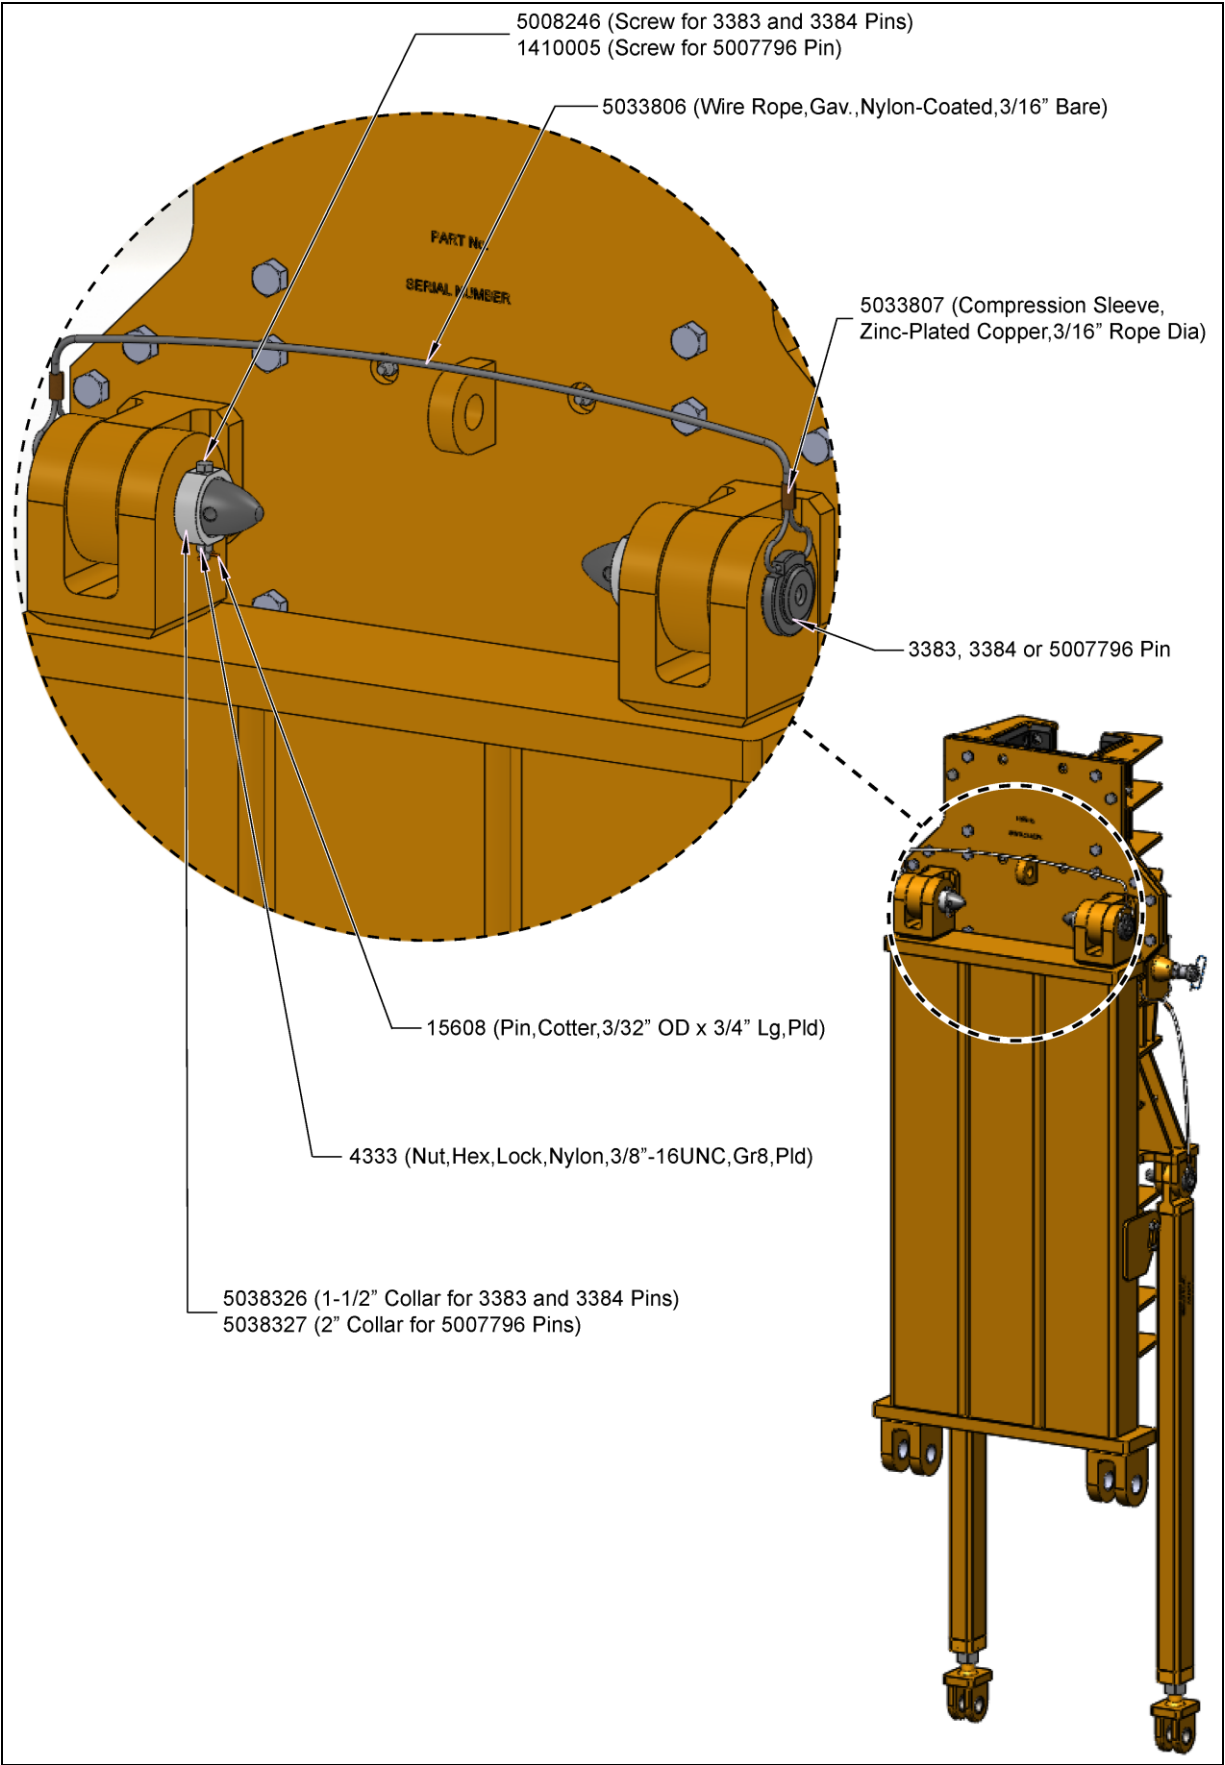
Torque bushing showing extend arm pin, steel wire safety lanyards, and crimp sleeve
